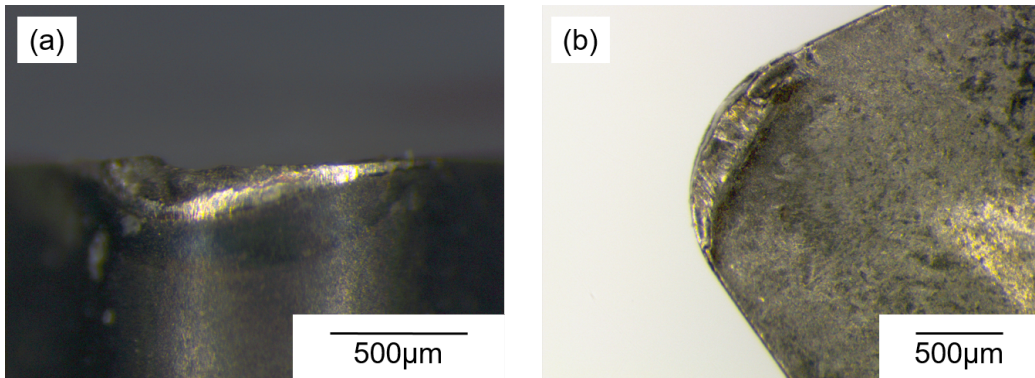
Microscope images showing the degree of tool wear after trial 1.2.3 on billet 4.1. Showing (a) the flank face and (b) the rake face.
